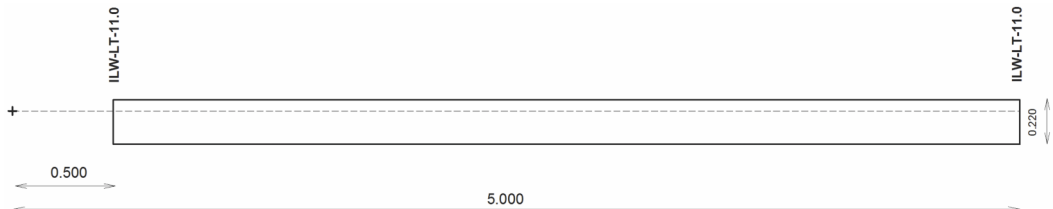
Geometry of the designed rectangular, uniform blade of the rotor ILW.11/11/11.D10.0 [Aut., 2015]
